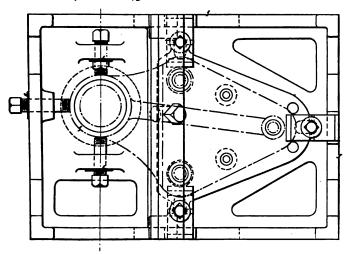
Simple Form of Plate Jig for Drilling Bracket shown in Fig. 97, after Hole E has been bored in the Lathe
